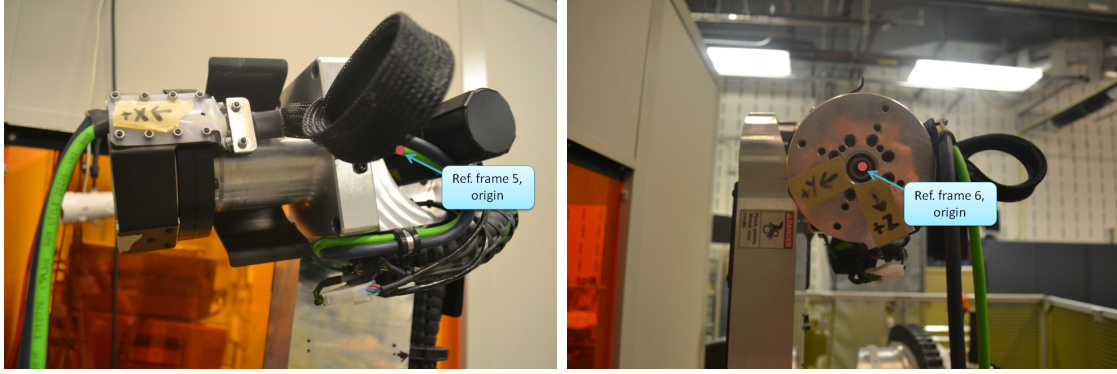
Wrist joints: the side view of wrist (left) displays the wrist-pitch motor housing and electrical cable protruding from the MTA; the front face (right) shows the mounting interface.
